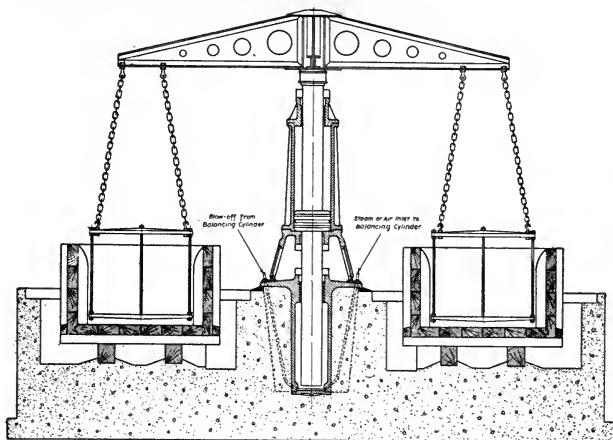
A SECTION SHOWING ARRANGEMENT OF MECHANICAL PICKLER
